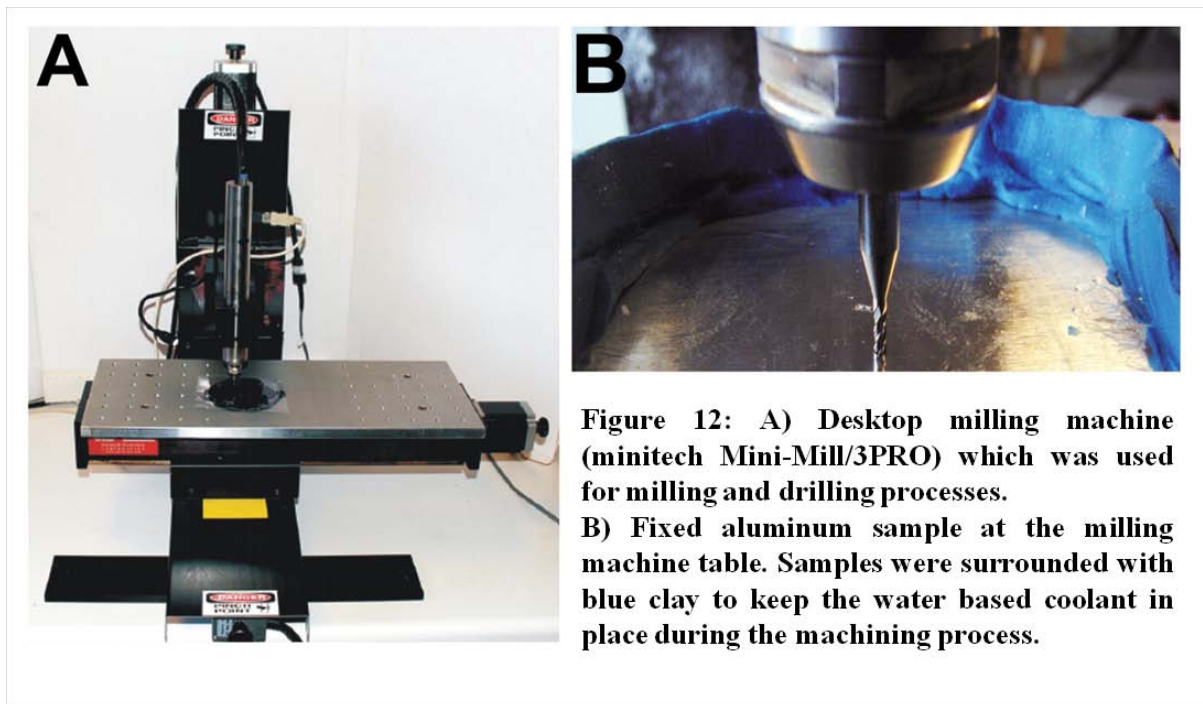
A) Desktop milling machine (minitech Mini-Mill/3PRO) which was used for milling and drilling processes. B) Fixed aluminum sample at the milling machine table. Samples were surrounded with blue clay to keep the water based coolant in place during the machining process.
